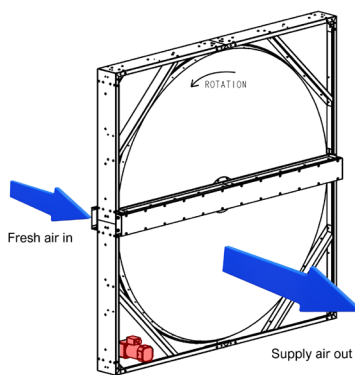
Motor assembly installed on AHU supply deck, downstream the Wheel itself
